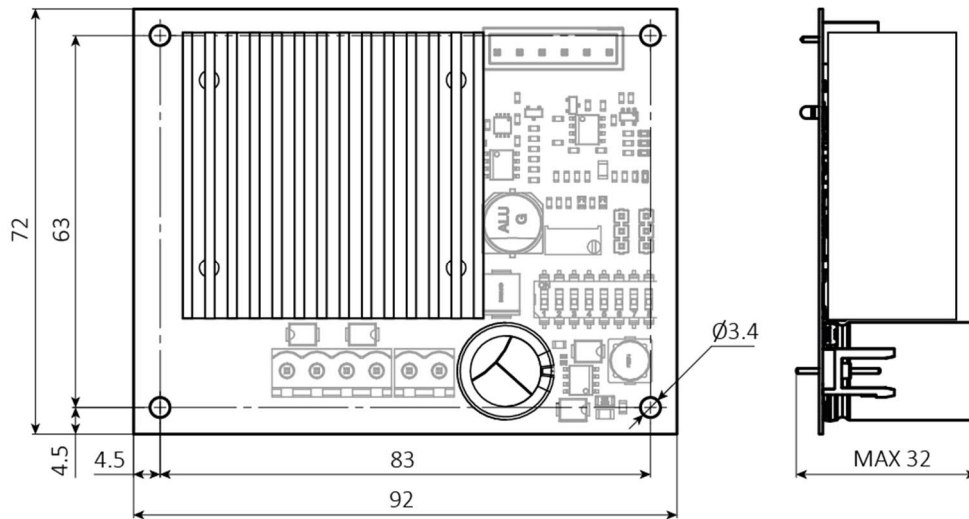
Dimensions of stepper motor driver SMD-2.8 open frame version
